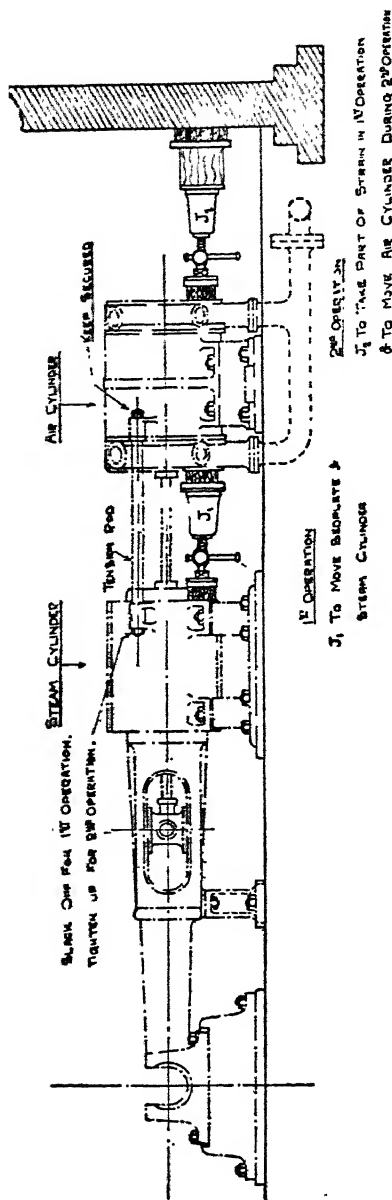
LAYOUT OF ENGINE (STRIPPED CONDITION), SHOWING JACKET ARRANGEMENT
